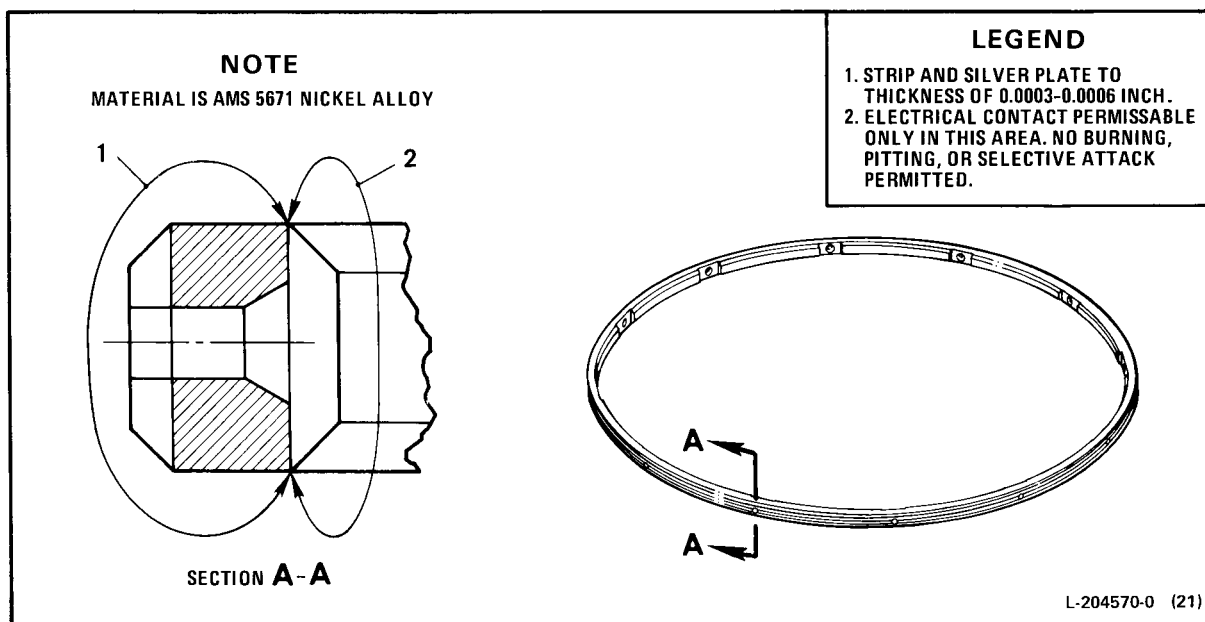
Bearing Retaining Nut (PN 4002513) - Silver Plate Replacement
